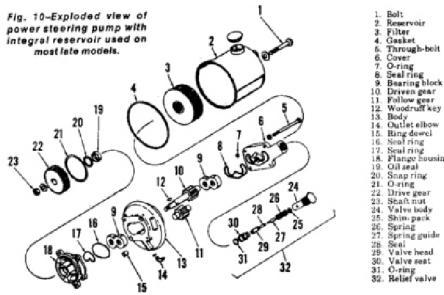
Exploded view of power steering pump with integral reservoir used on most late models.
